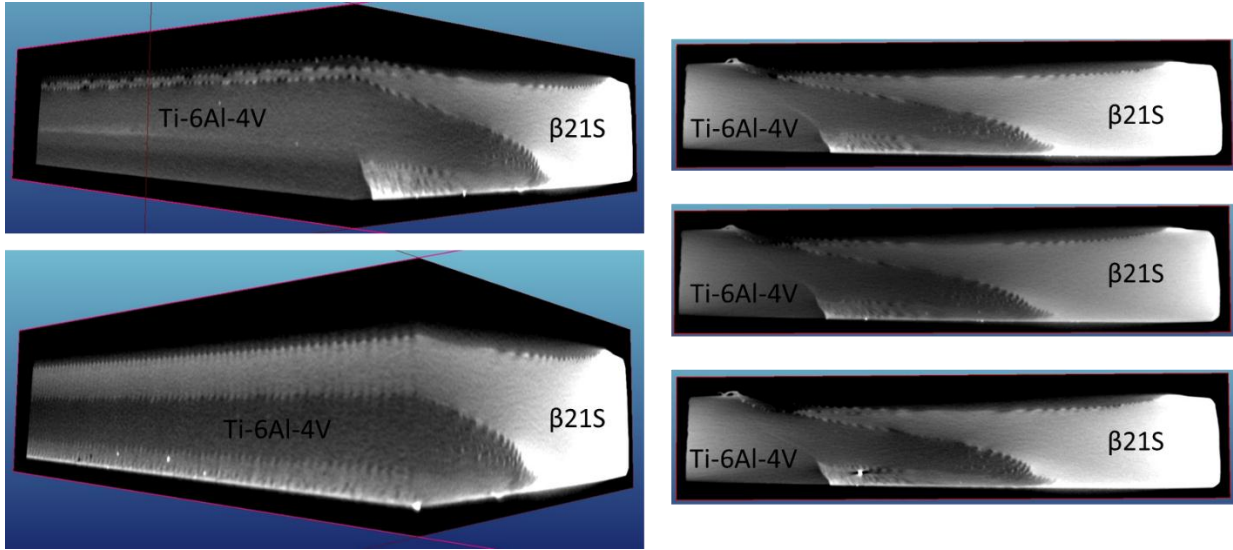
Weld 2 micro CT scans. Y-Z/X-Z $\frac{3}{4}$ (retreating/weld travel direction facing) views on the left, Y-Z (weld travel direction facing) views on the right.
